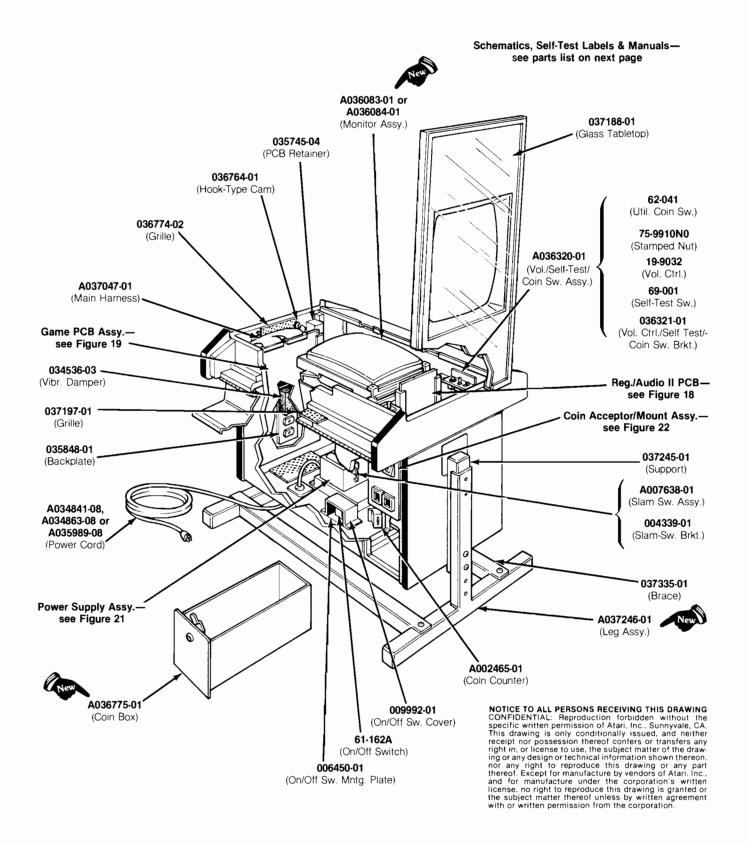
Cabinet-Mounted Assemblies A037172-01 B
